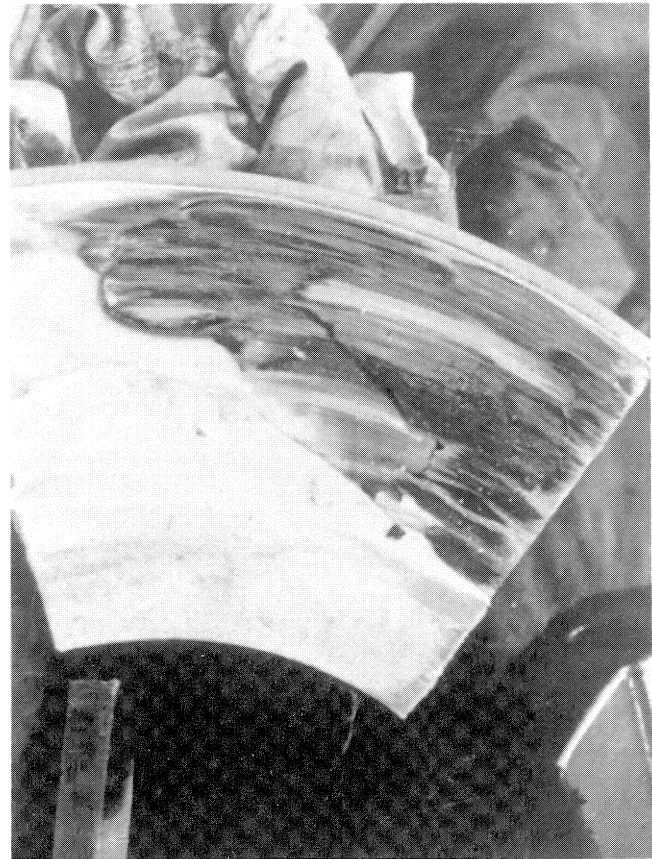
A Wiped 21.75 in (55 cm) Thrust Bearing Pad Due to Overload.
